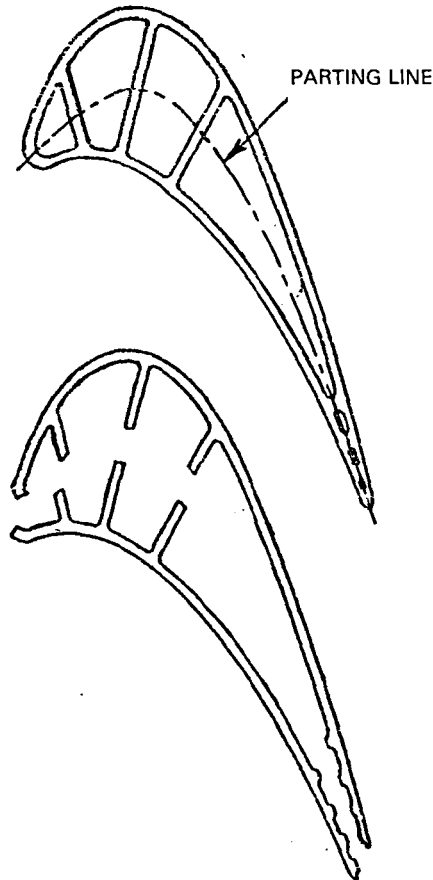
Two-Piece Fabrication Approach for Blades and Vanes
